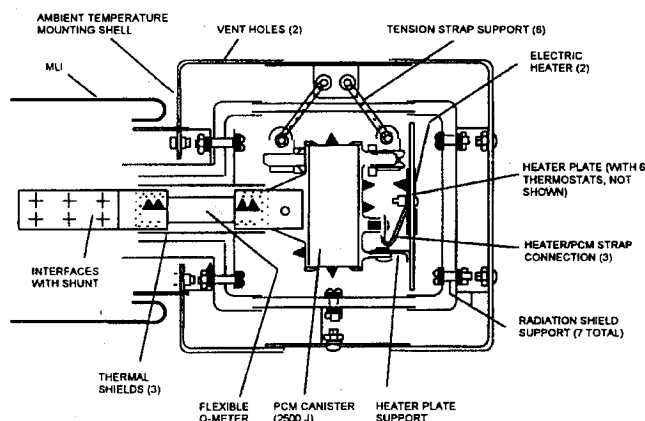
BETSU mechanical assembly: ▲, platinum resistance thermometers (10).
